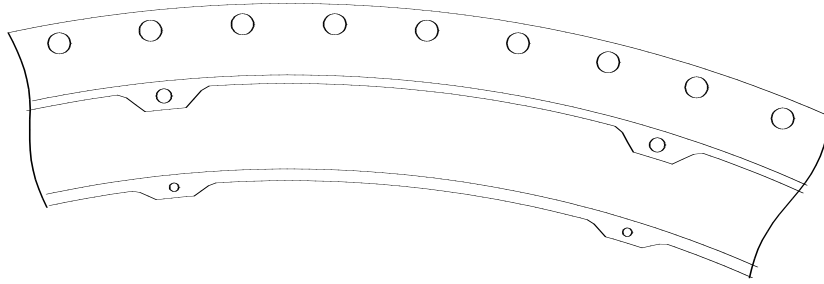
View A of the Bolt Holes and Scallops for the Aft Flange
